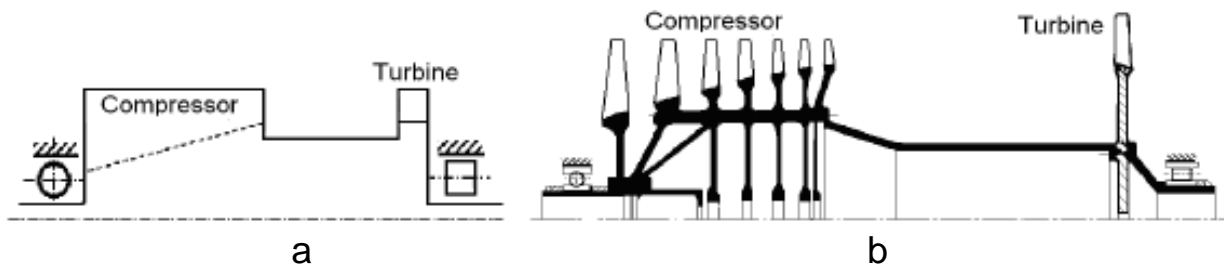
Two-support rotor with front support placed before compressor and rear support placed after turbine:
